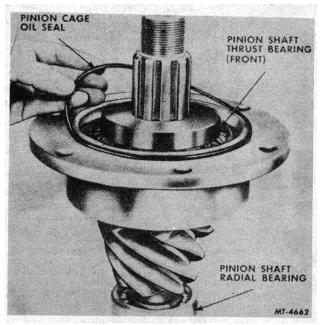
Removing Pinion Cage Oil Seal (rear rear axle only).
